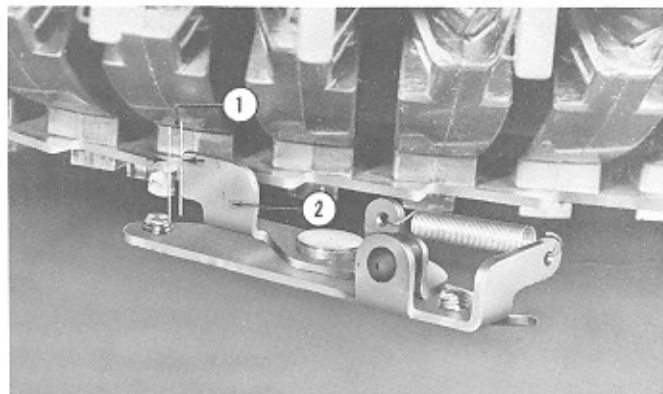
ACTUATING SCREW ADJUSTMENT, CARRIAGE SWITCH
